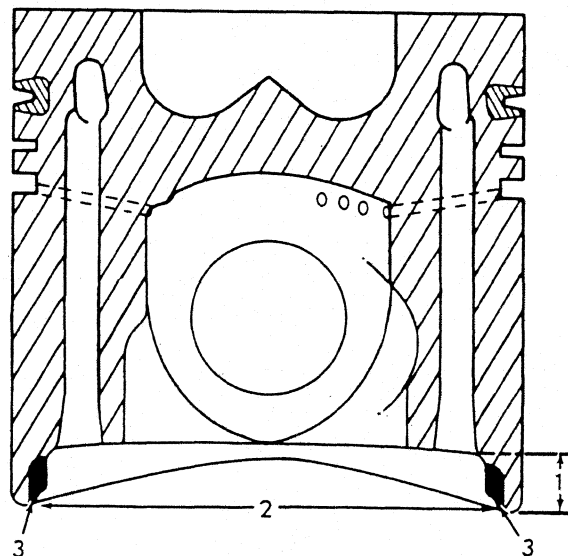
PISTON SURFACE THAT MAY T-82269 BE MACHINED TO REDUCE WEIGHT
